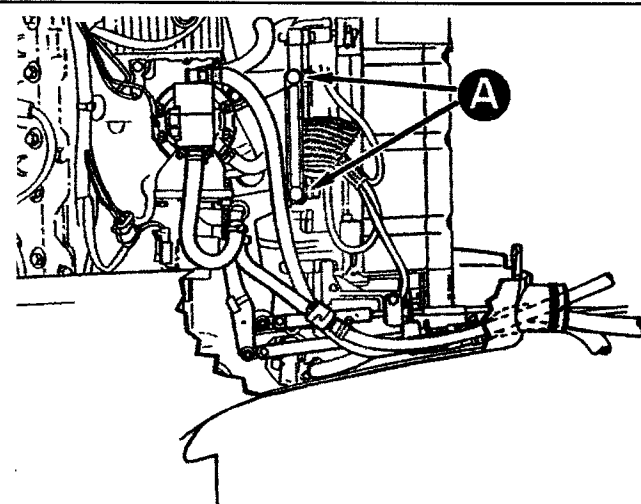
Throttle and shift linkage lubrication points-200-250 hp V6 FICHT motors
